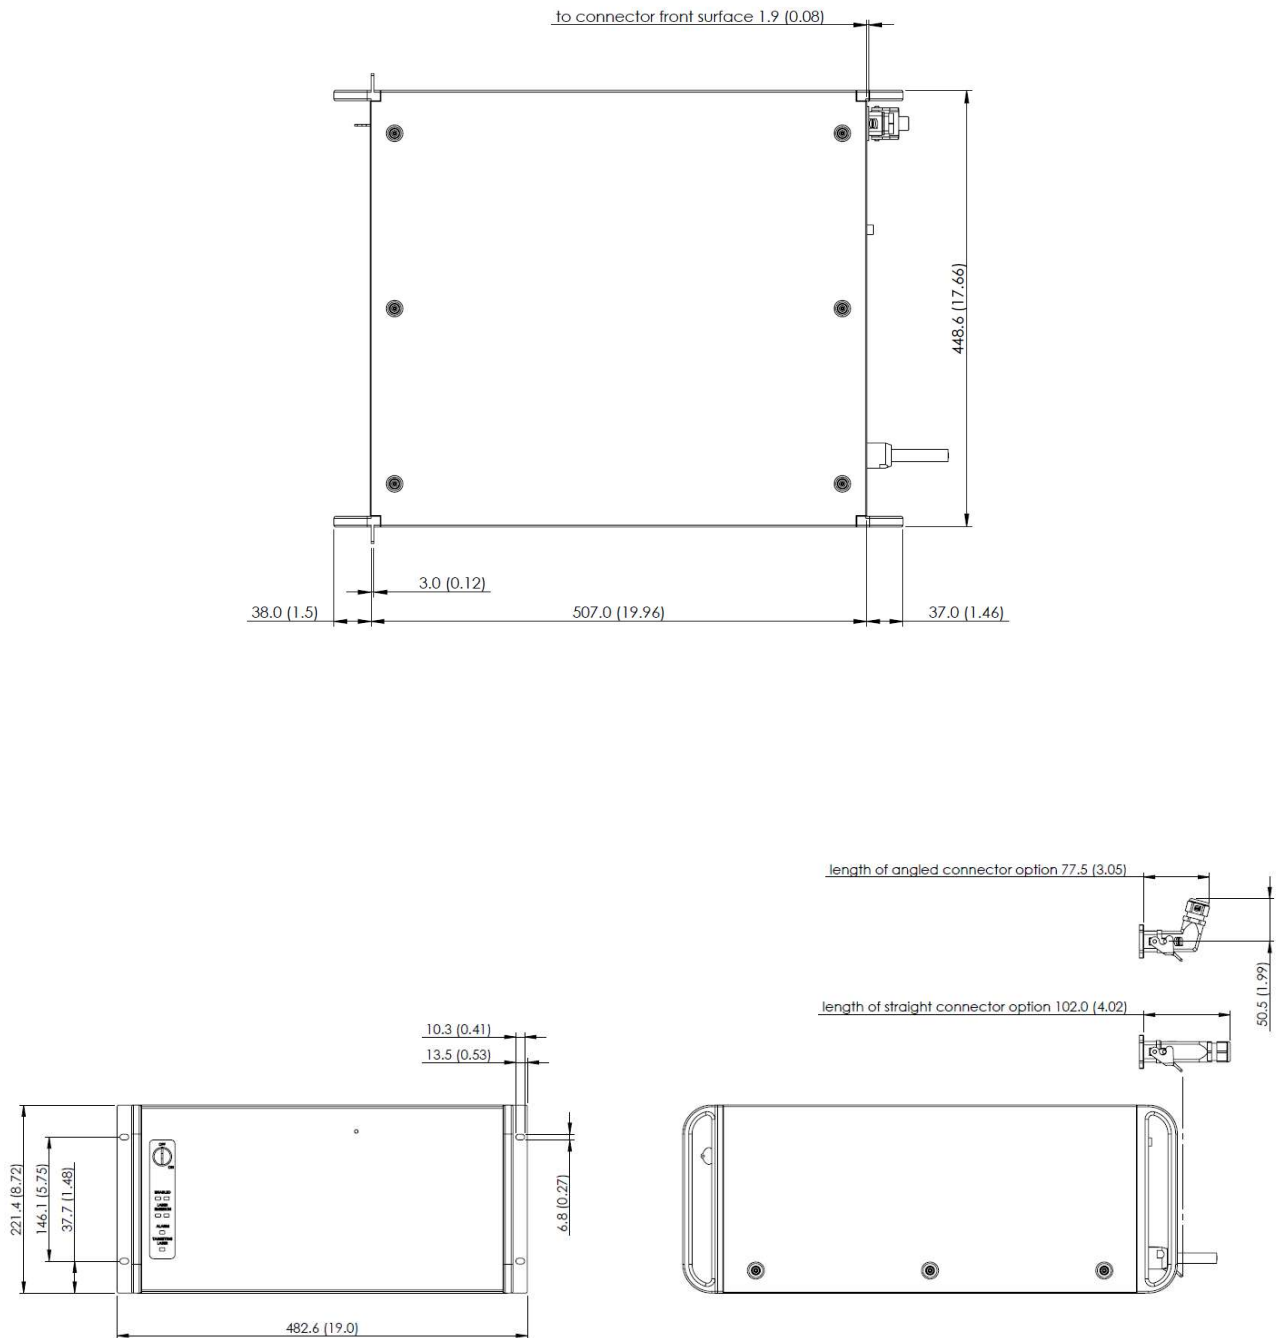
Outline Drawing – Laser System – Water Cooled Variants
